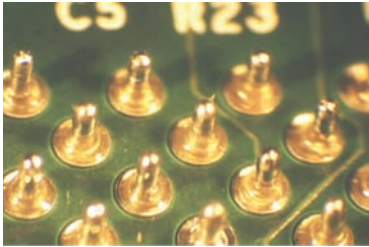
Satisfactory solder joints on through-hole Pin Grid Array (PGA) connectors.
